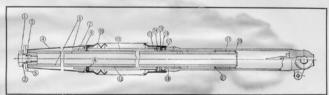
24-B Front cushion [\$ 90, CL 90, CL 90 L, CT 90 (from F. No. 000001 A)]
